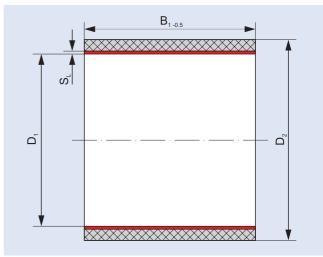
Drawing of deva.tex® cylindrical bearings
